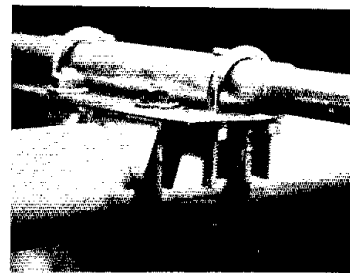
Photograph illustrating the element-to-boom clamp. Heavy-gauge scrap aluminum, U-bolts and plated muffler clamps were used to make up the assembly.
